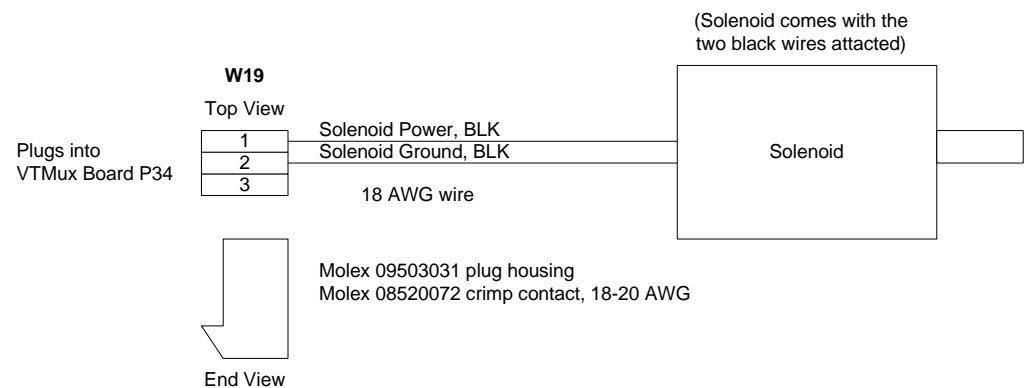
VTMUX BOARD P34 TO BRAKE SOLENOID
